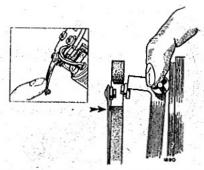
Setting the contact blade to ensure contact with the pedestal ridge
